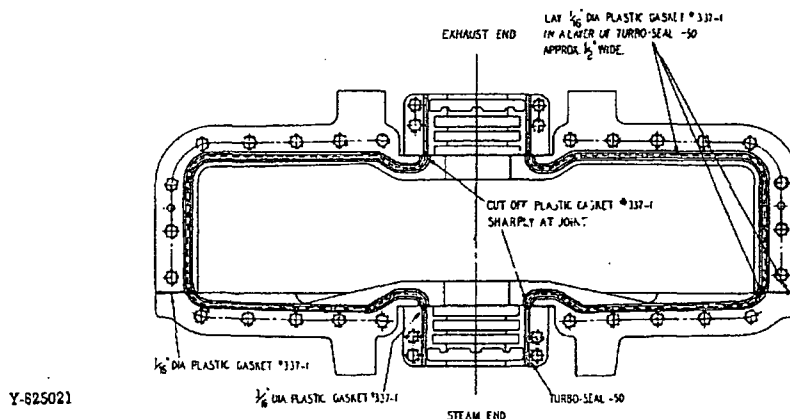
"YR" HORIZONTAL JOINT DETAIL
